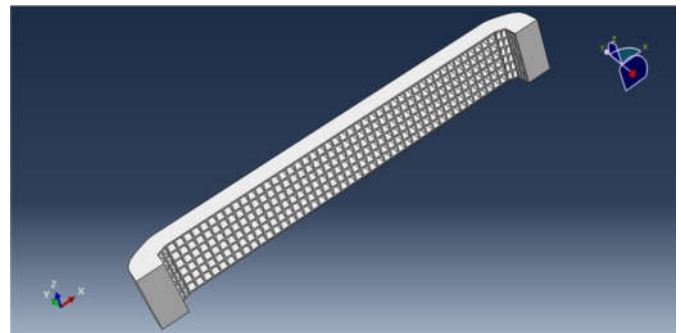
(b) Rectangular honeycomb bumper for front and rear impact (rear view)
